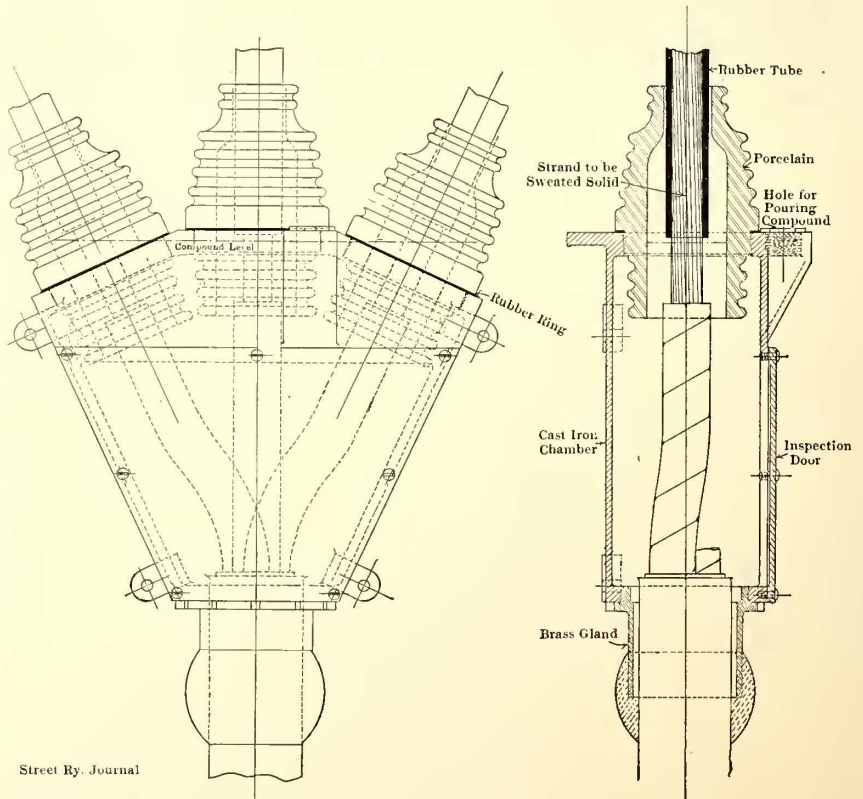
END CONNECTION FOR THREE-CORE CABLE. ONE-SIXTH ACTUAL SIZE
